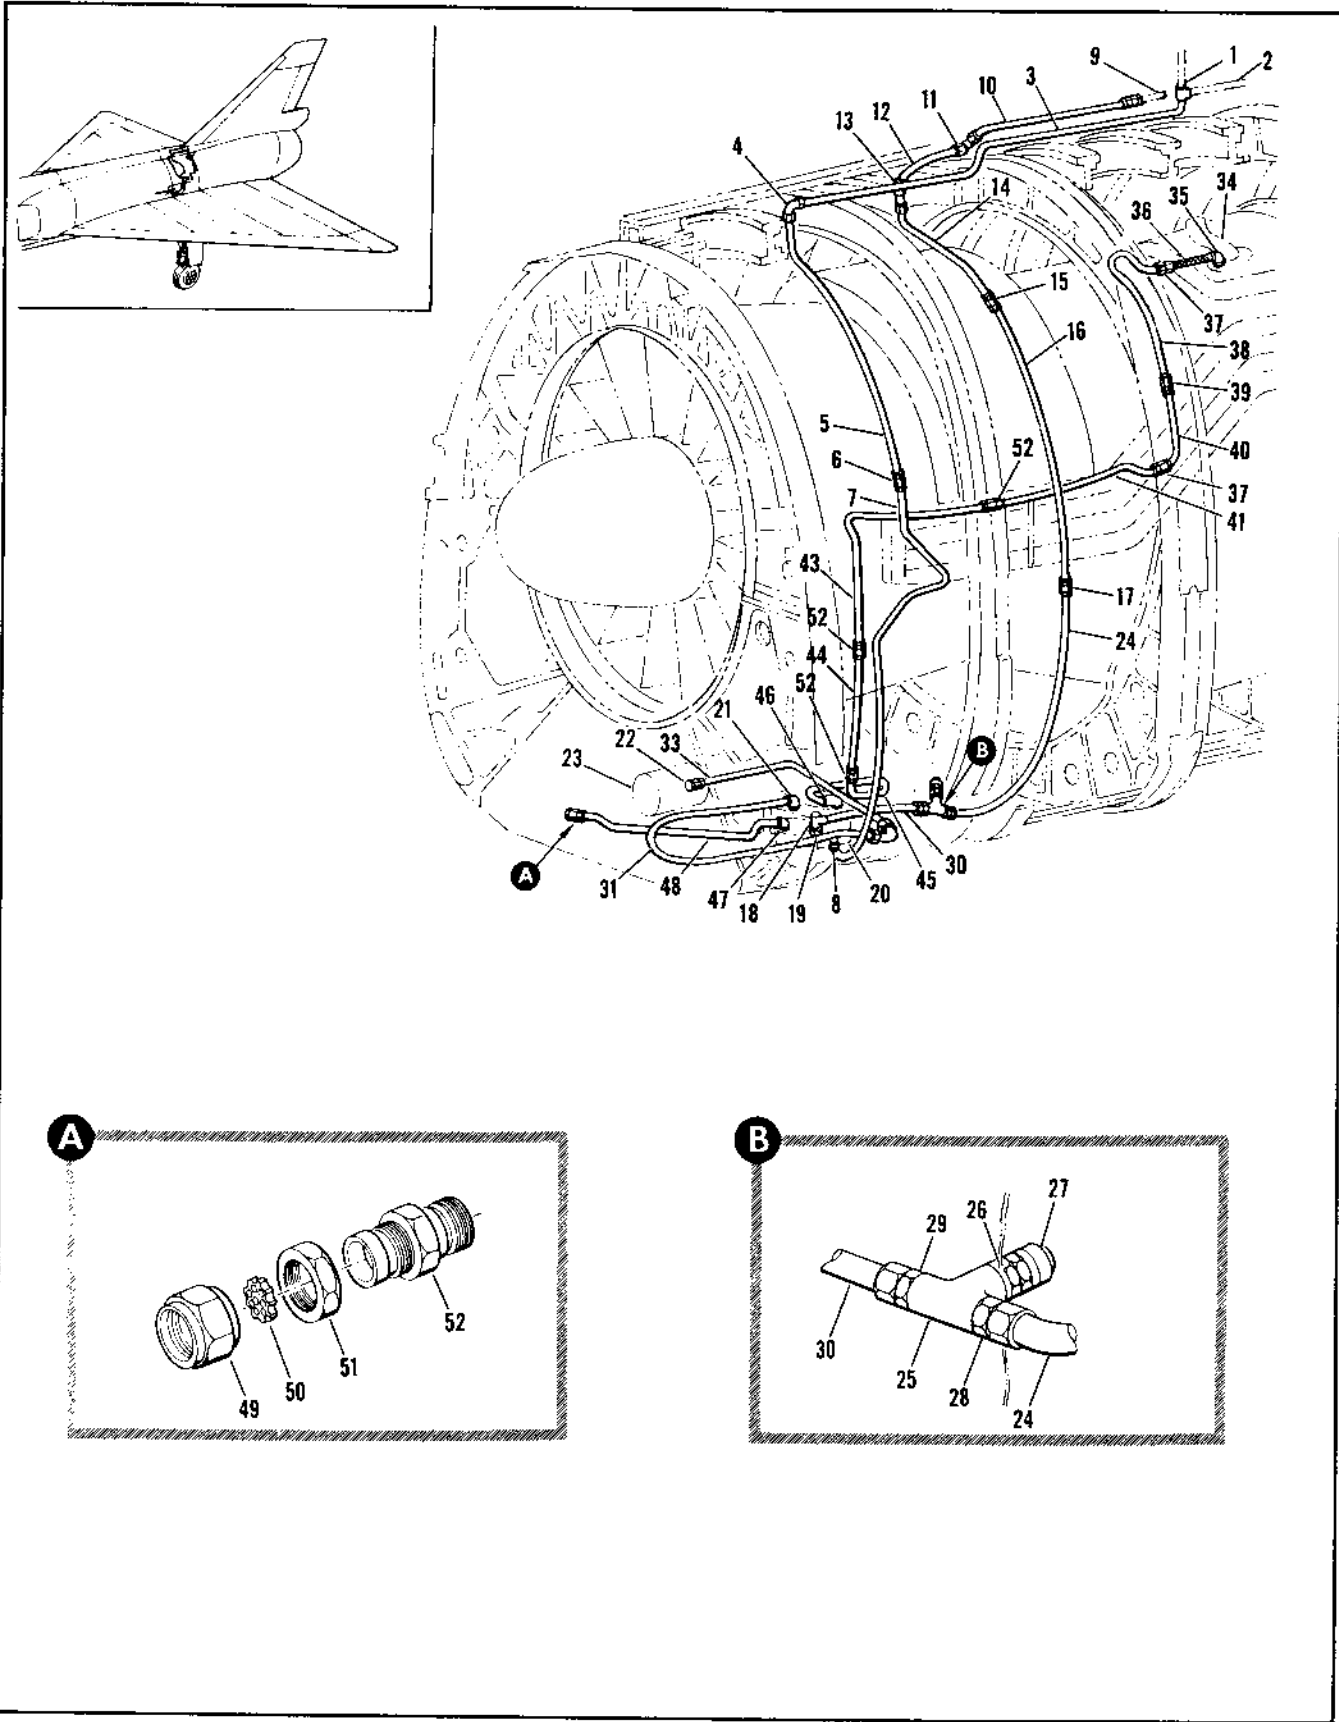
Elevator and Rudder Airfeel Tubing Installation Sta 472 to Vertical Stabilizer
